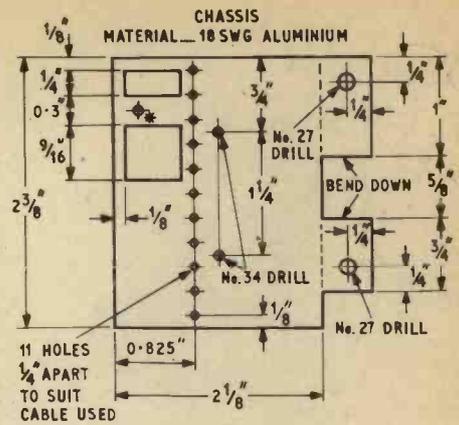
Chassis construction. The fixing hole for the relay base should be marked with the base in position
